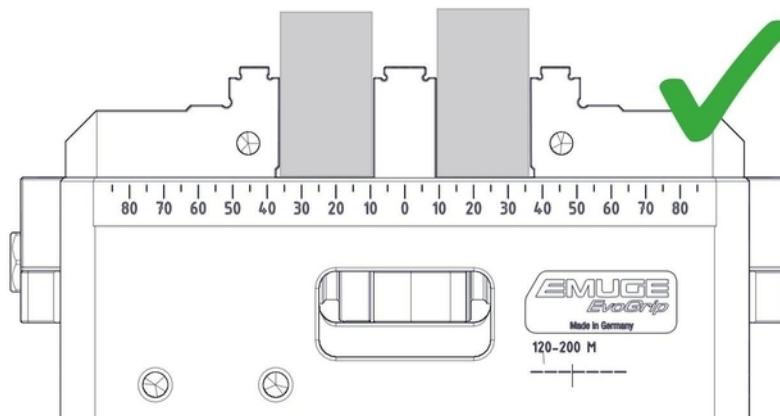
Schematic illustration: Correct clamping of 2 workpieces
